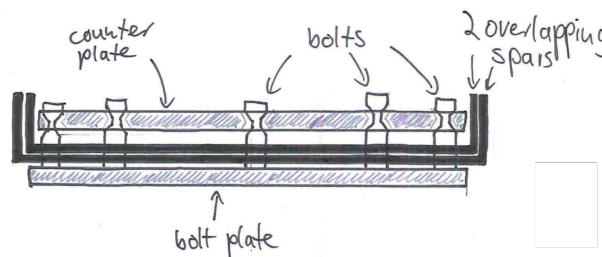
Cross-sectional view of the bolt plate with a counter plate to secure the bolts in place
